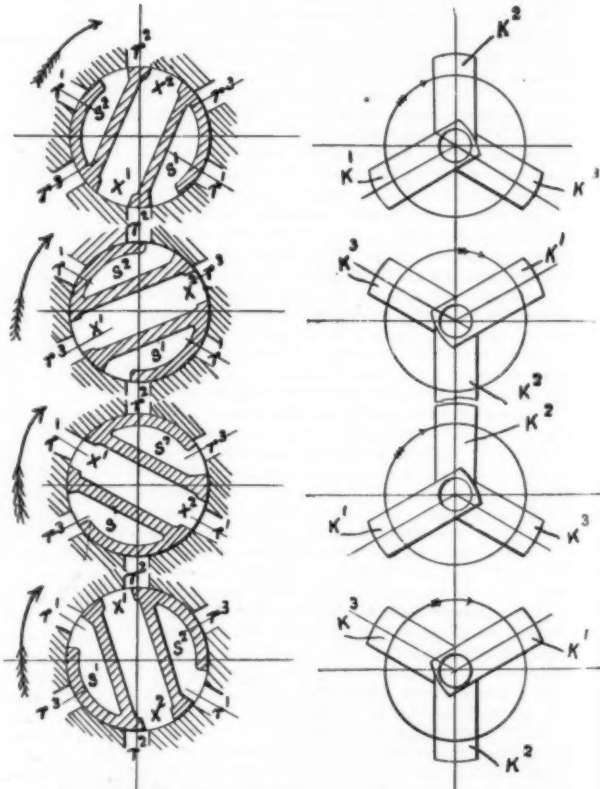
DIAGRAMS SHOWING POSITIONS OF THE VALVE AND THE CRANKS WHILE CRANKSHAFT IS MAKING ONE REVOLUTION.
